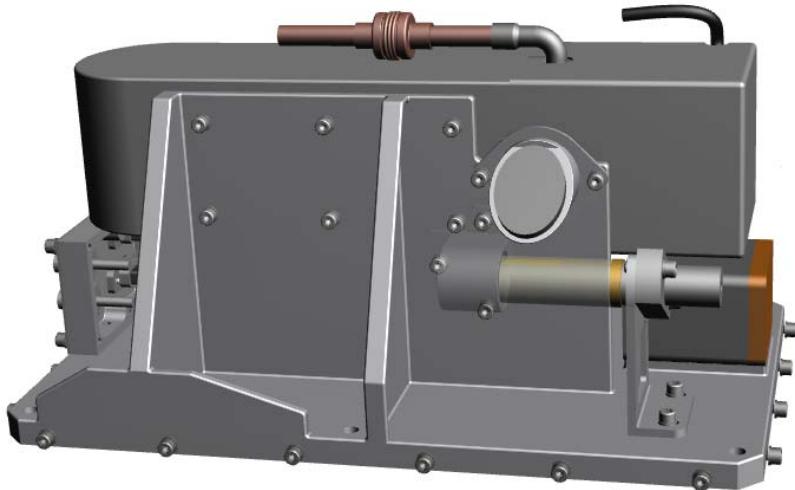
The ~ 3 liter physics package with baseplate, photomultiplier tube, and vacuum tube mounting through the two-layer magnetic shield. The outer magnetic shield is not shown.
